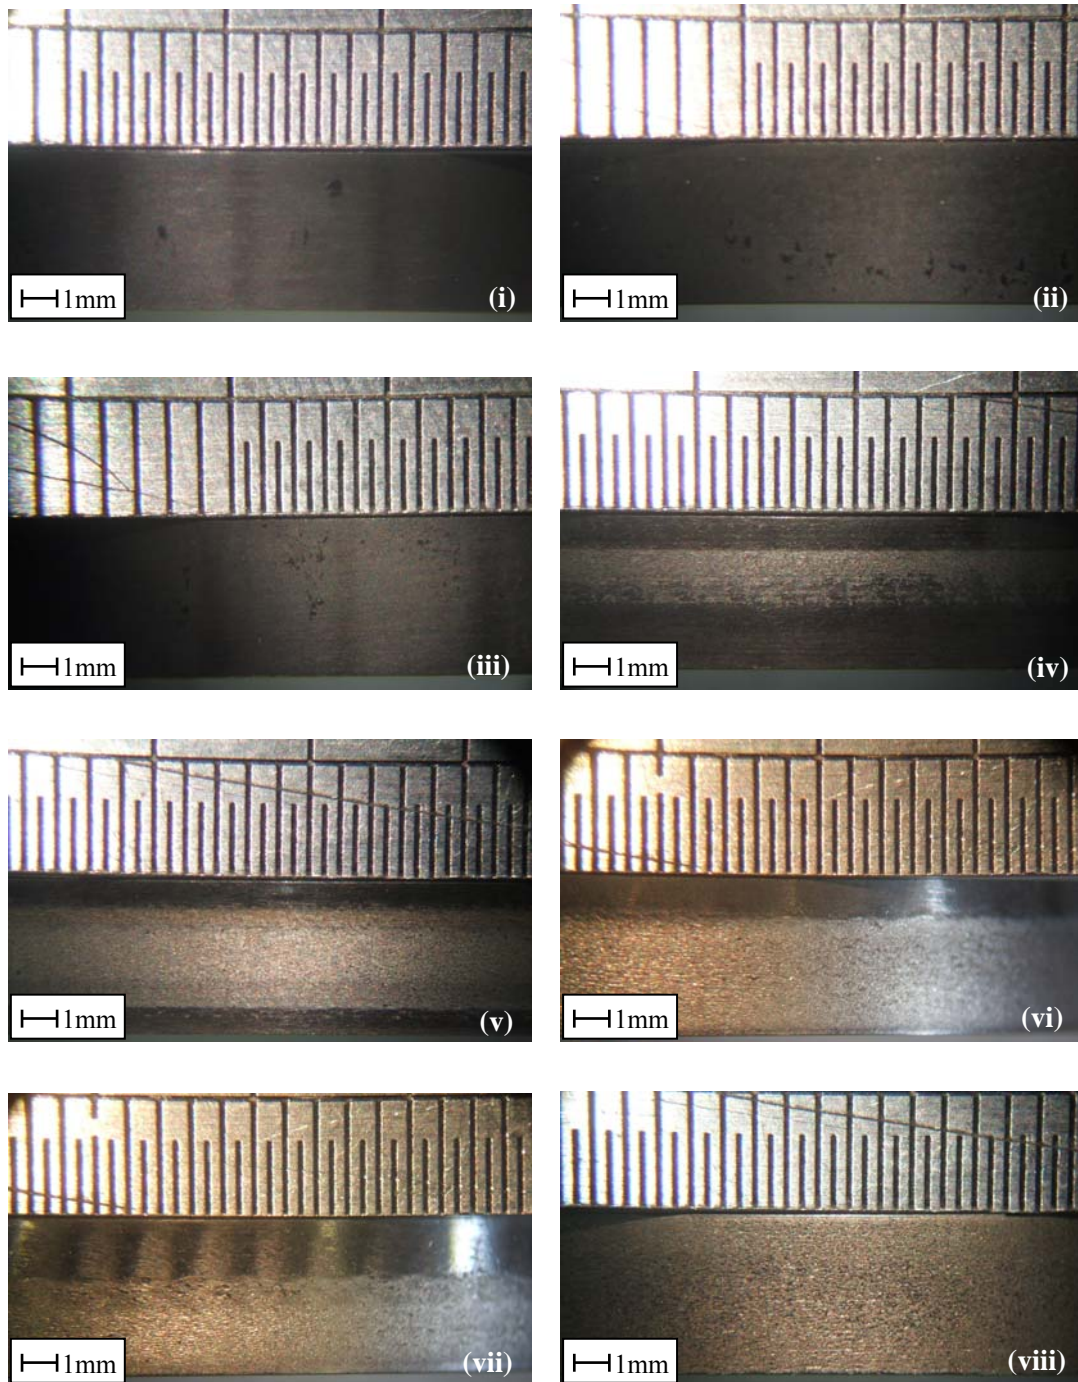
Optical inspection of the coated test samples surfaces after 2GPa LCF testing
